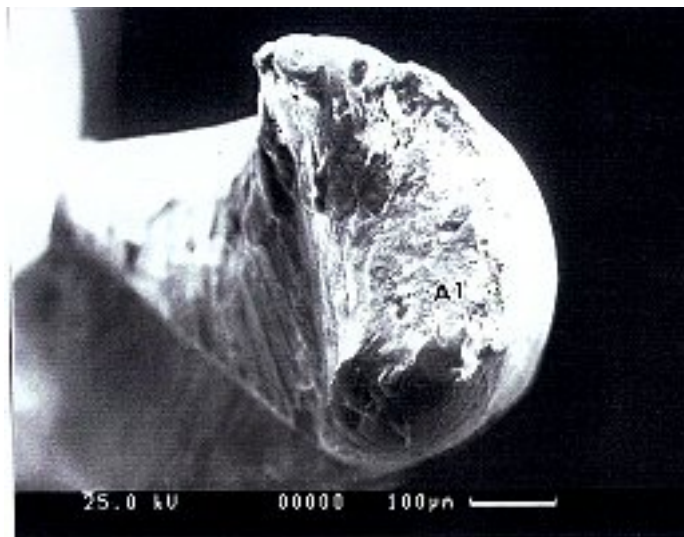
The SEM image shows A fracture surface of the #1 wire. The fracture surface is half-moon shaped with the left side squeezed into a spiral form.
